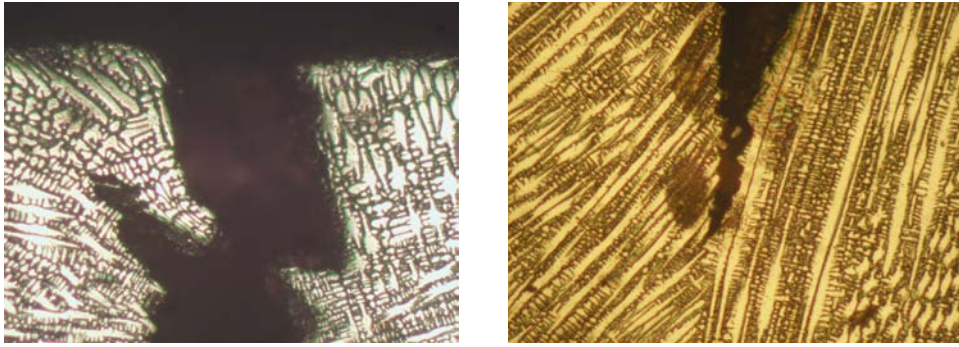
a) Macro cross-section showing hot cracking propagated into the surface of the first filling pass. b) The top view from the Figure 6a showing hot cracking along the weld length.
